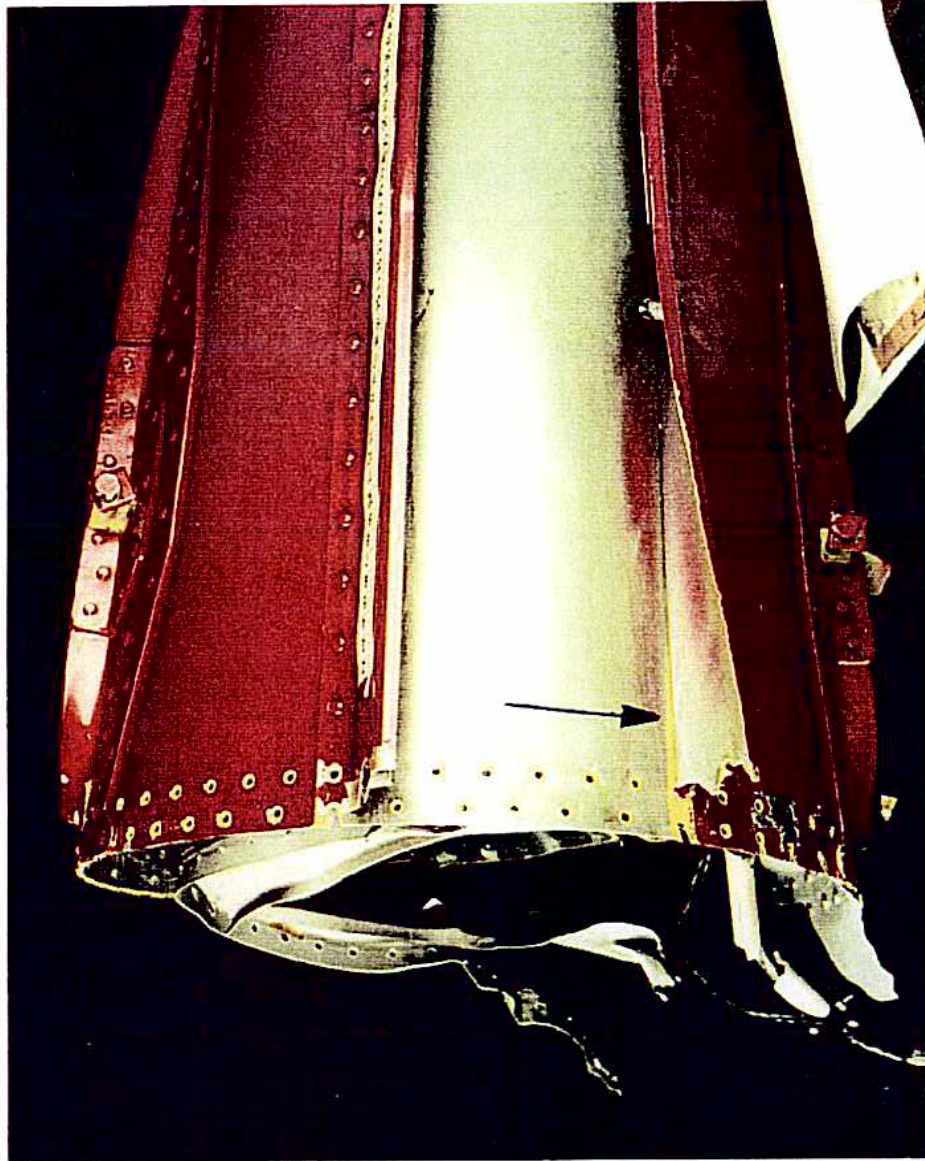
Upper surface view of the front end of the rear tail boom unit. Note that the one support stiffener for the drive shaft fairing is significantly bent towards the L/H side (helicopter axis) as a consequence of the pitch control rod bending and pulling, shown in Fig. 5. The deformed stiffener in question is arrowed.
